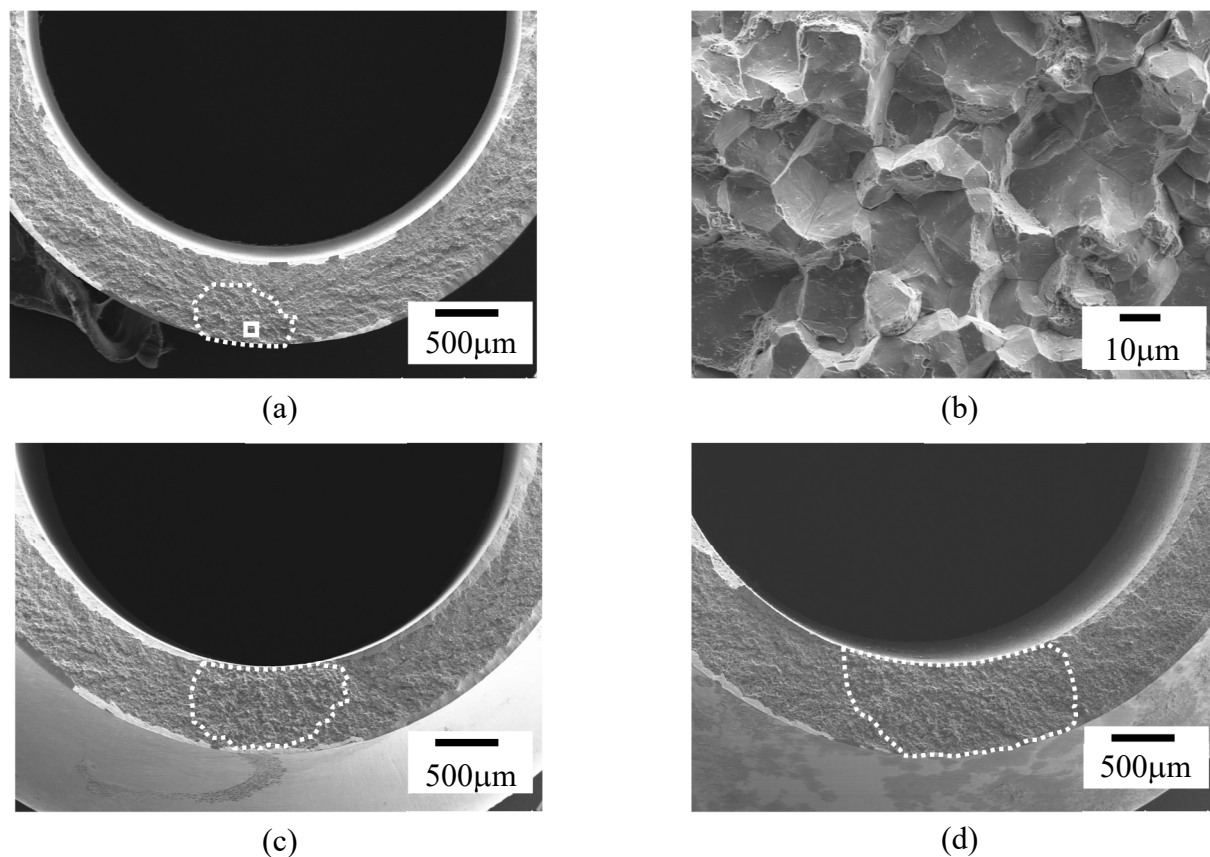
SEM images of fracture surface after constant load test in biodiesel fuel with water; (a) fracture origin,  $t_r = 0.2$  hr, (b) magnified view indicated by the rectangular area in (a), (c) fracture origin,  $t_r = 44.5$  hr, and (d) fracture origin,  $t_r = 70.7$  hr.
